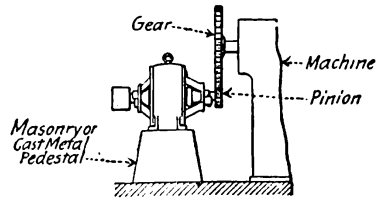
Motor mounting for gear drive (no limitation to center distance).
